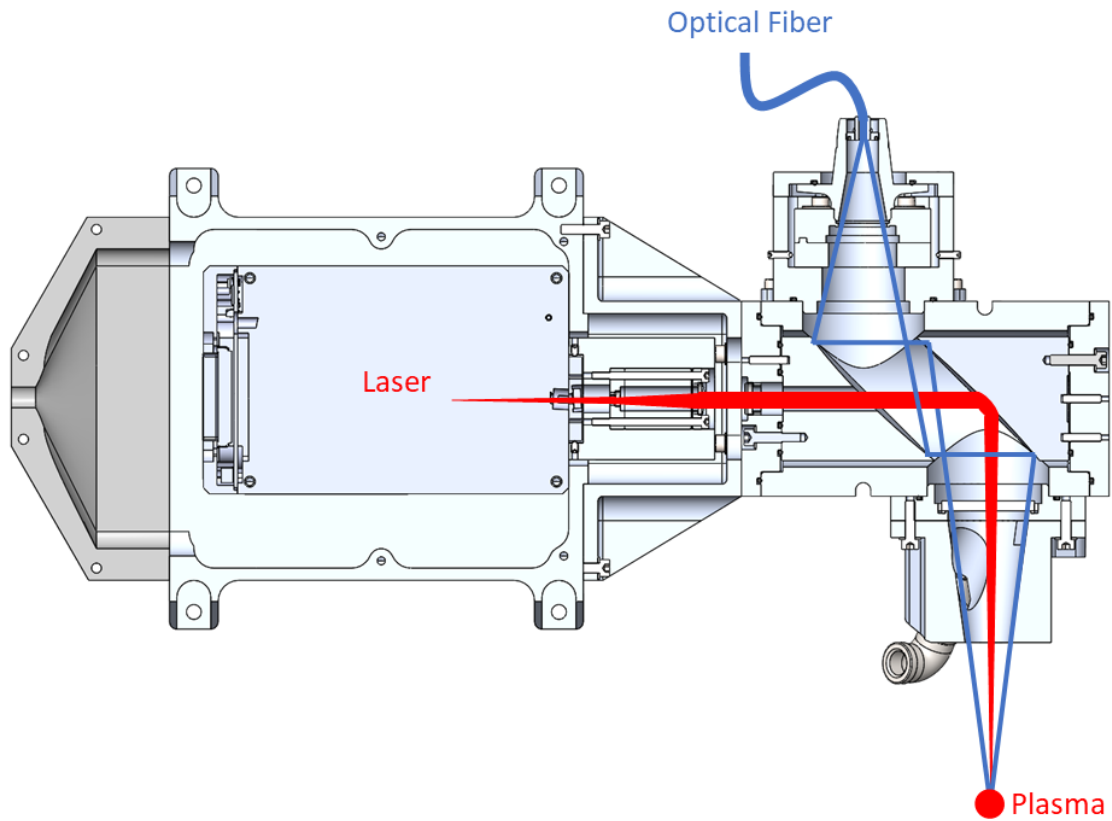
CAD cross-sectional view of the optical head containing the laser head and the optical components. The illumination path is shown in red, the measurement path in blue. Thickness of path lines is not on real scale. Laser head cable and power resistor are not modeled.
